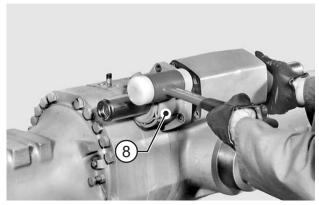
Check the condition of the axle unit's o-rings (9). Grease piston seats with Tecnolube Seal 101 and install cylinder using a plastic hammer.
